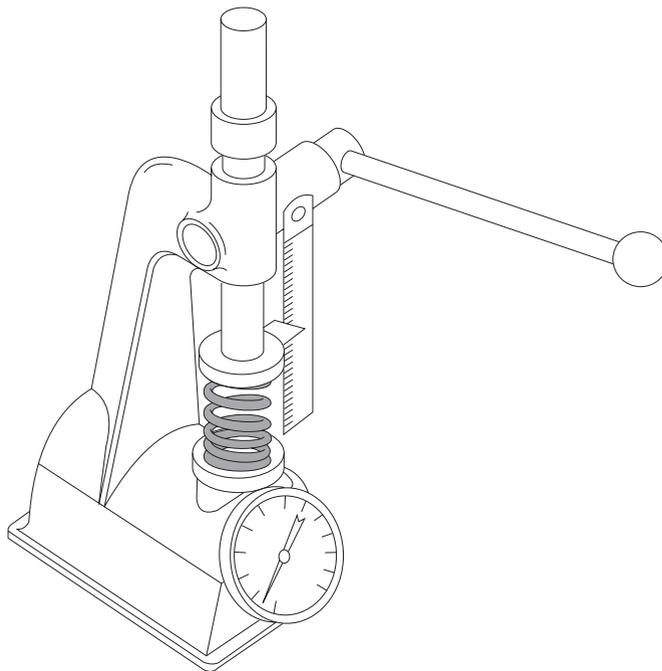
Measuring valve spring tension by using a valve spring tester
